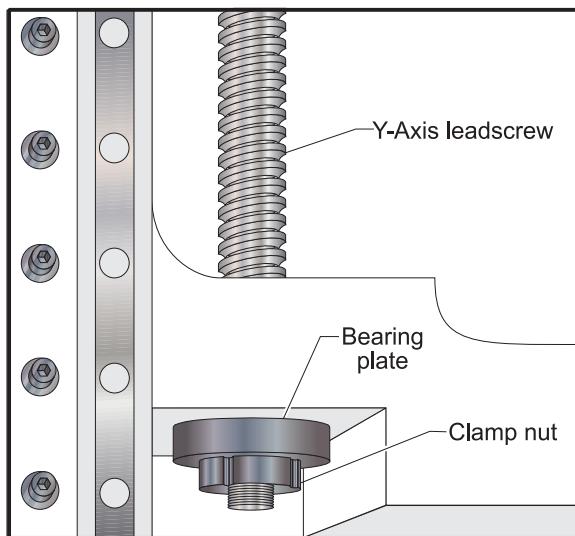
Y-axis lead screw bearing support end clamp nut.
